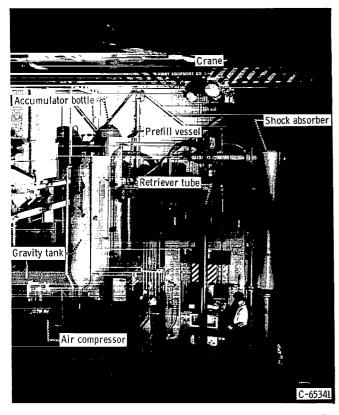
Rear view of press with retriever retracted from extrusion pit.
